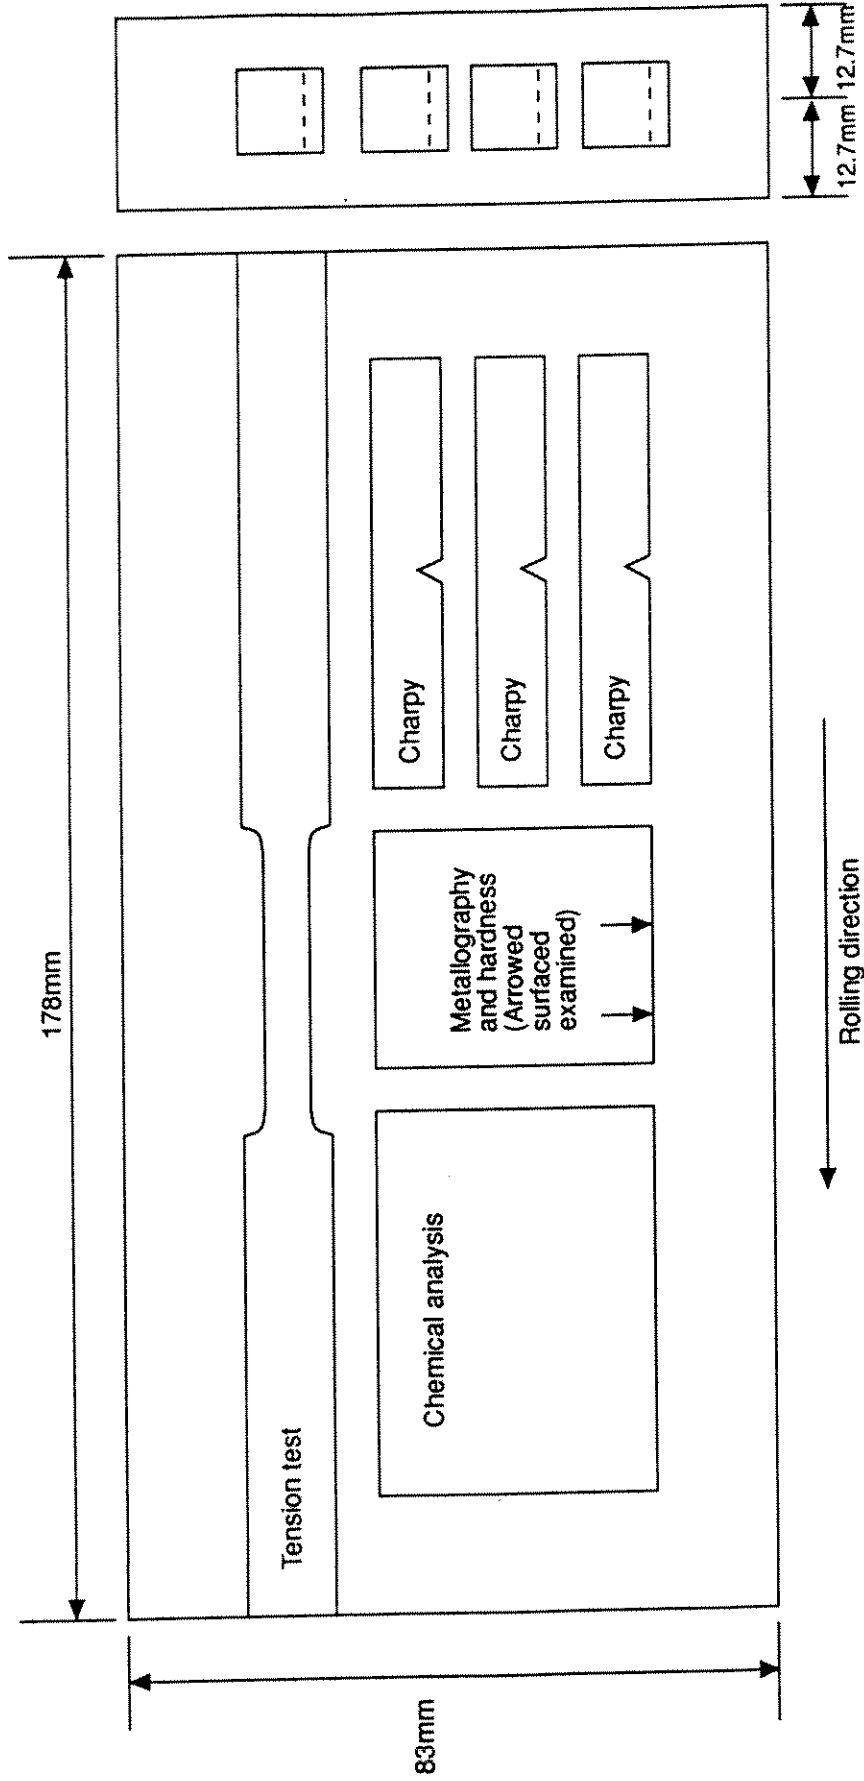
TEST COUPON SHOWING DISPOSITION OF SPECIMENS
